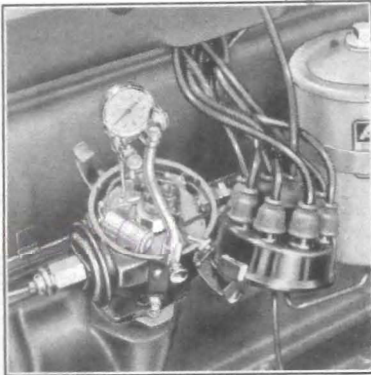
Dial indicator check of breaker point opening, using distributor point checking fixture support, J-850
